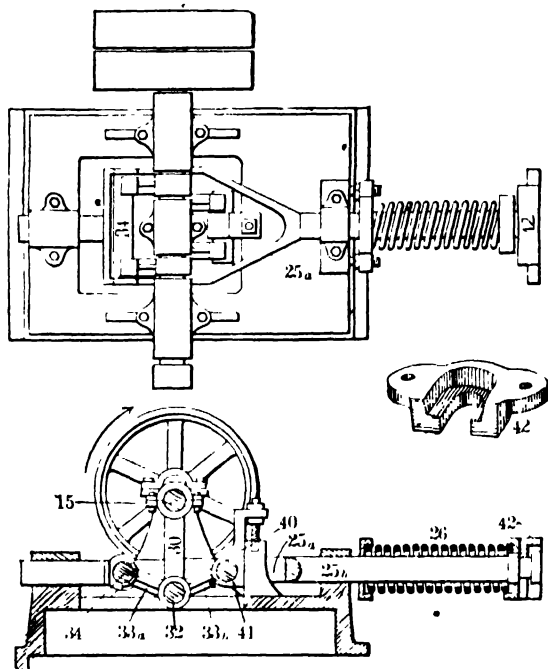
The No. 3 Wilfley Table : Driving Mechanism.
